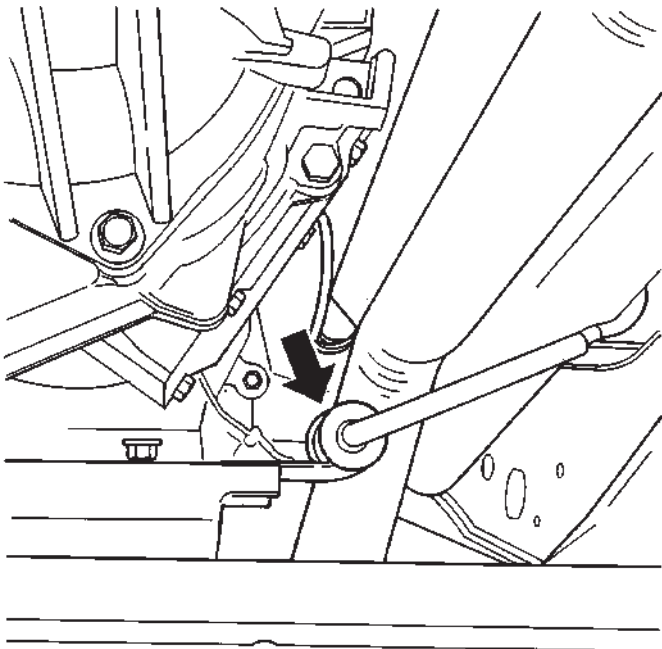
BRAKE LINES TO CALIPERS (REAR)
